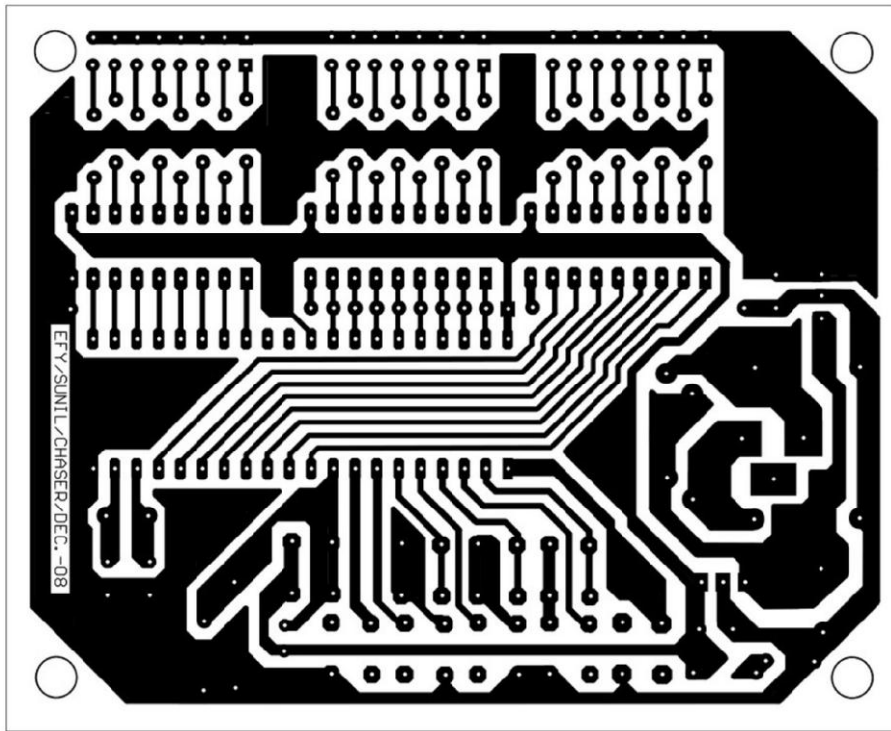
A single-side, actual-size PCB layout for LED light chaser
